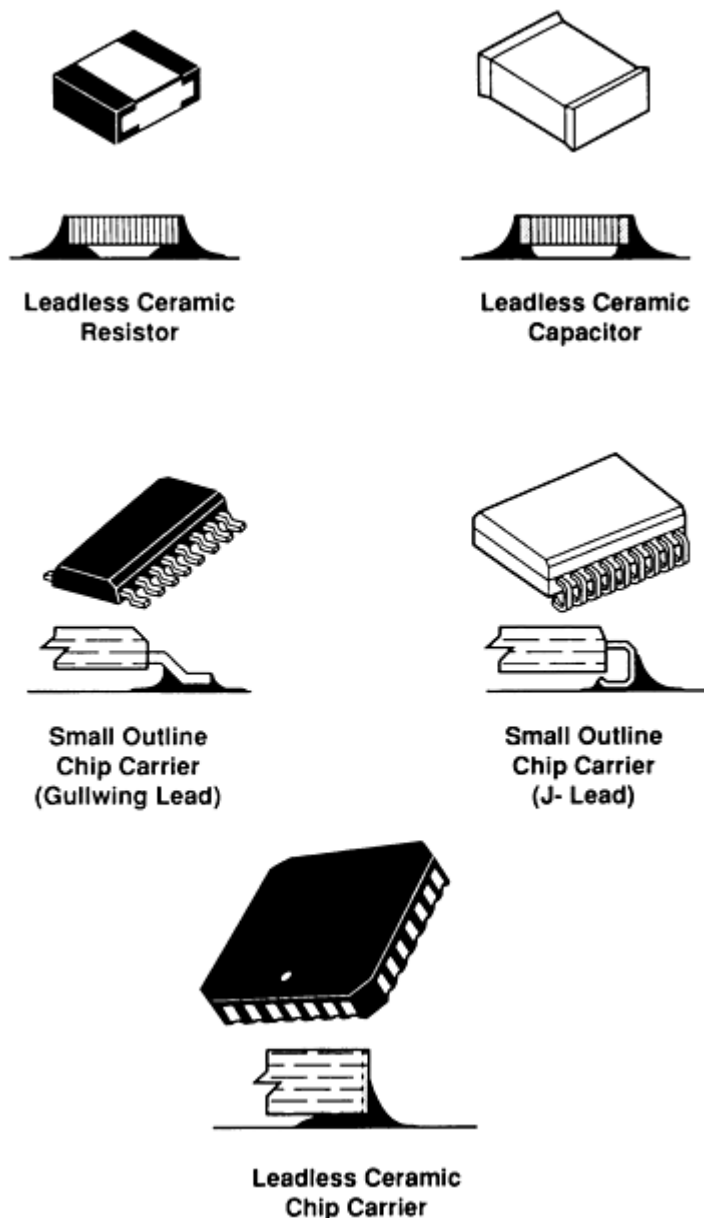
PACKAGE AND LEAD CONFIGURATION OF SURFACE-MOUNT DEVICES, INCLUDING SOLDER JOINT PROFILES
